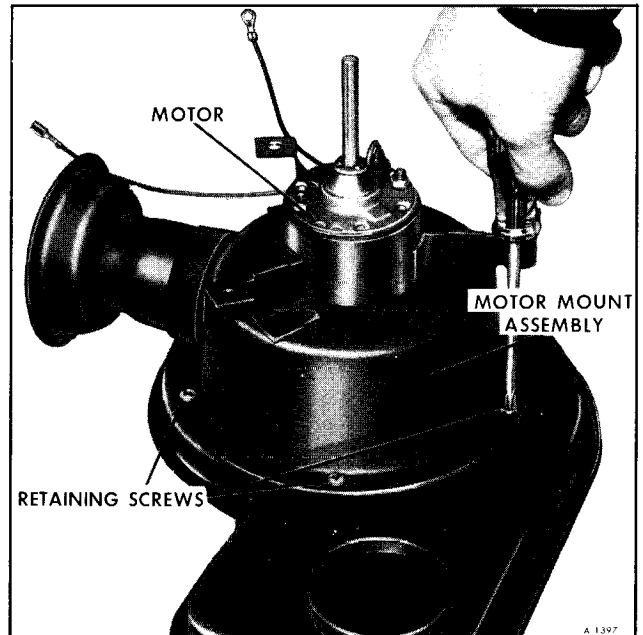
Removing Motor and Mount Assembly Retaining Screws
